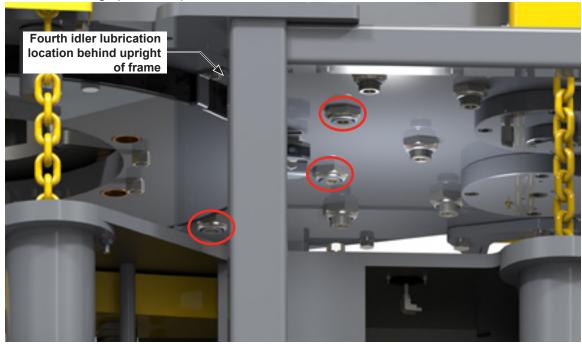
Idler Gear Lubrication (Bottom)
